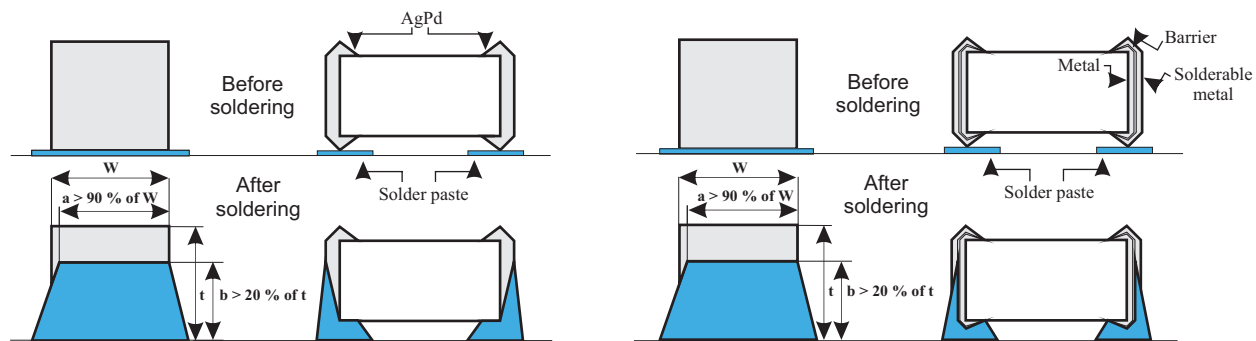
Soldering Criterion in case of Wave and IR Reflow Pb-containing Soldering
